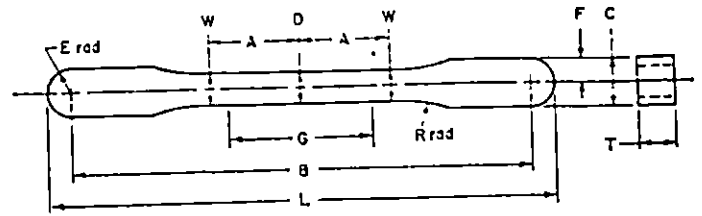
Standard Tension Test Specimen for Malleable Iron
